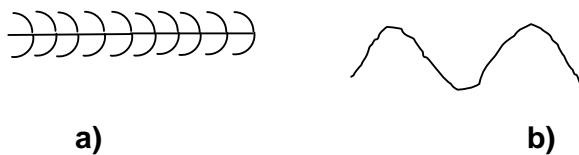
Schematic diagram showing weld bead a) stringer bead and b) weaver bead
